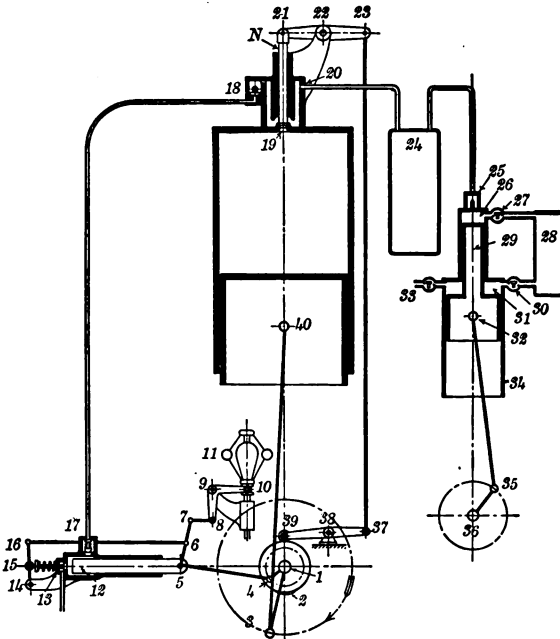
DIAGRAM OF FOUR-STROKE DIESEL OIL ENGINE SHOWING COMPRESSED AIR, FUEL PUMP, AND GOVERNOR MECHANISMS
